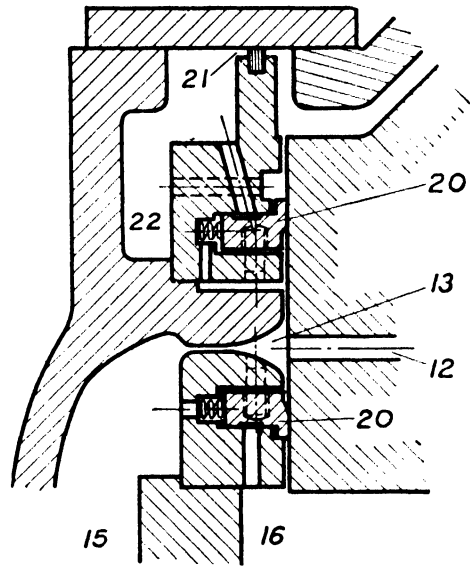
Enlarged detail of part of fig. V, 11
